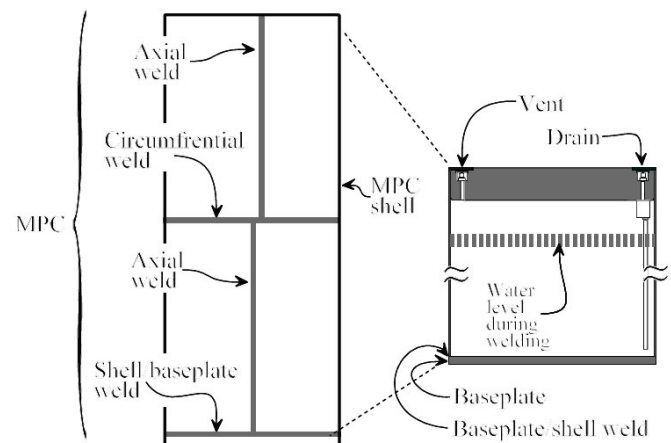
WELDS ON A MULTIPURPOSE CANISTER (REPRODUCED FROM NUREG-1864 [18], FIG. 16)
